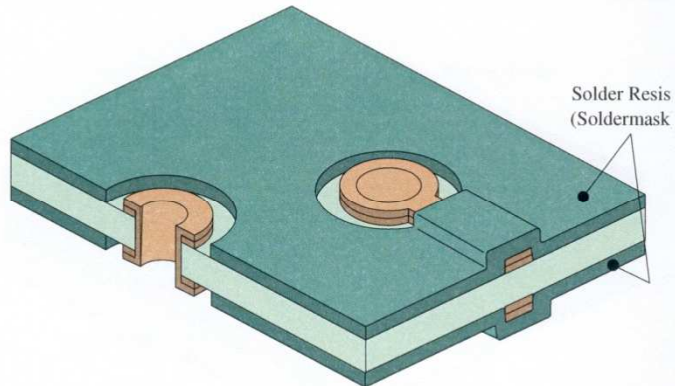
Apply solder resist. The specified resist (dry film, liquid photoimageable, or screen printed) is applied to the surfaces of the PCB or panel.
